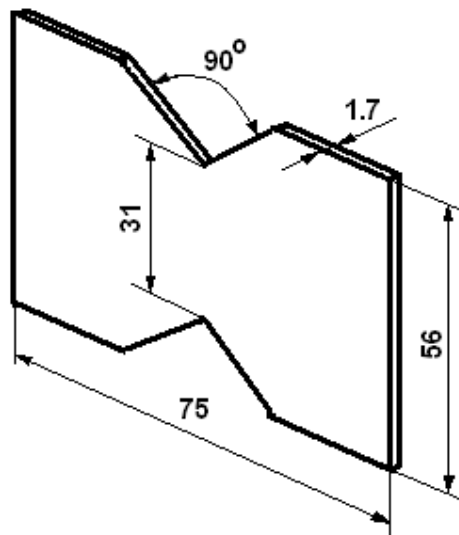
Dimensions (mm) of the V-notched rail shear test specimen
